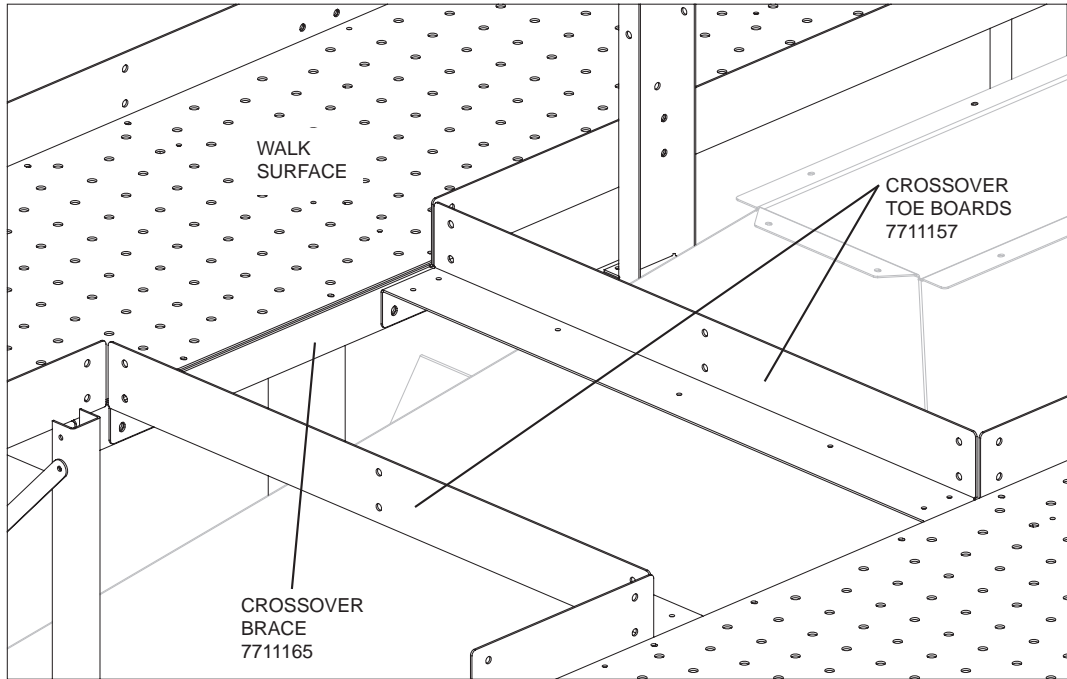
Installing Crossover Toe Boards and Crossover Braces
